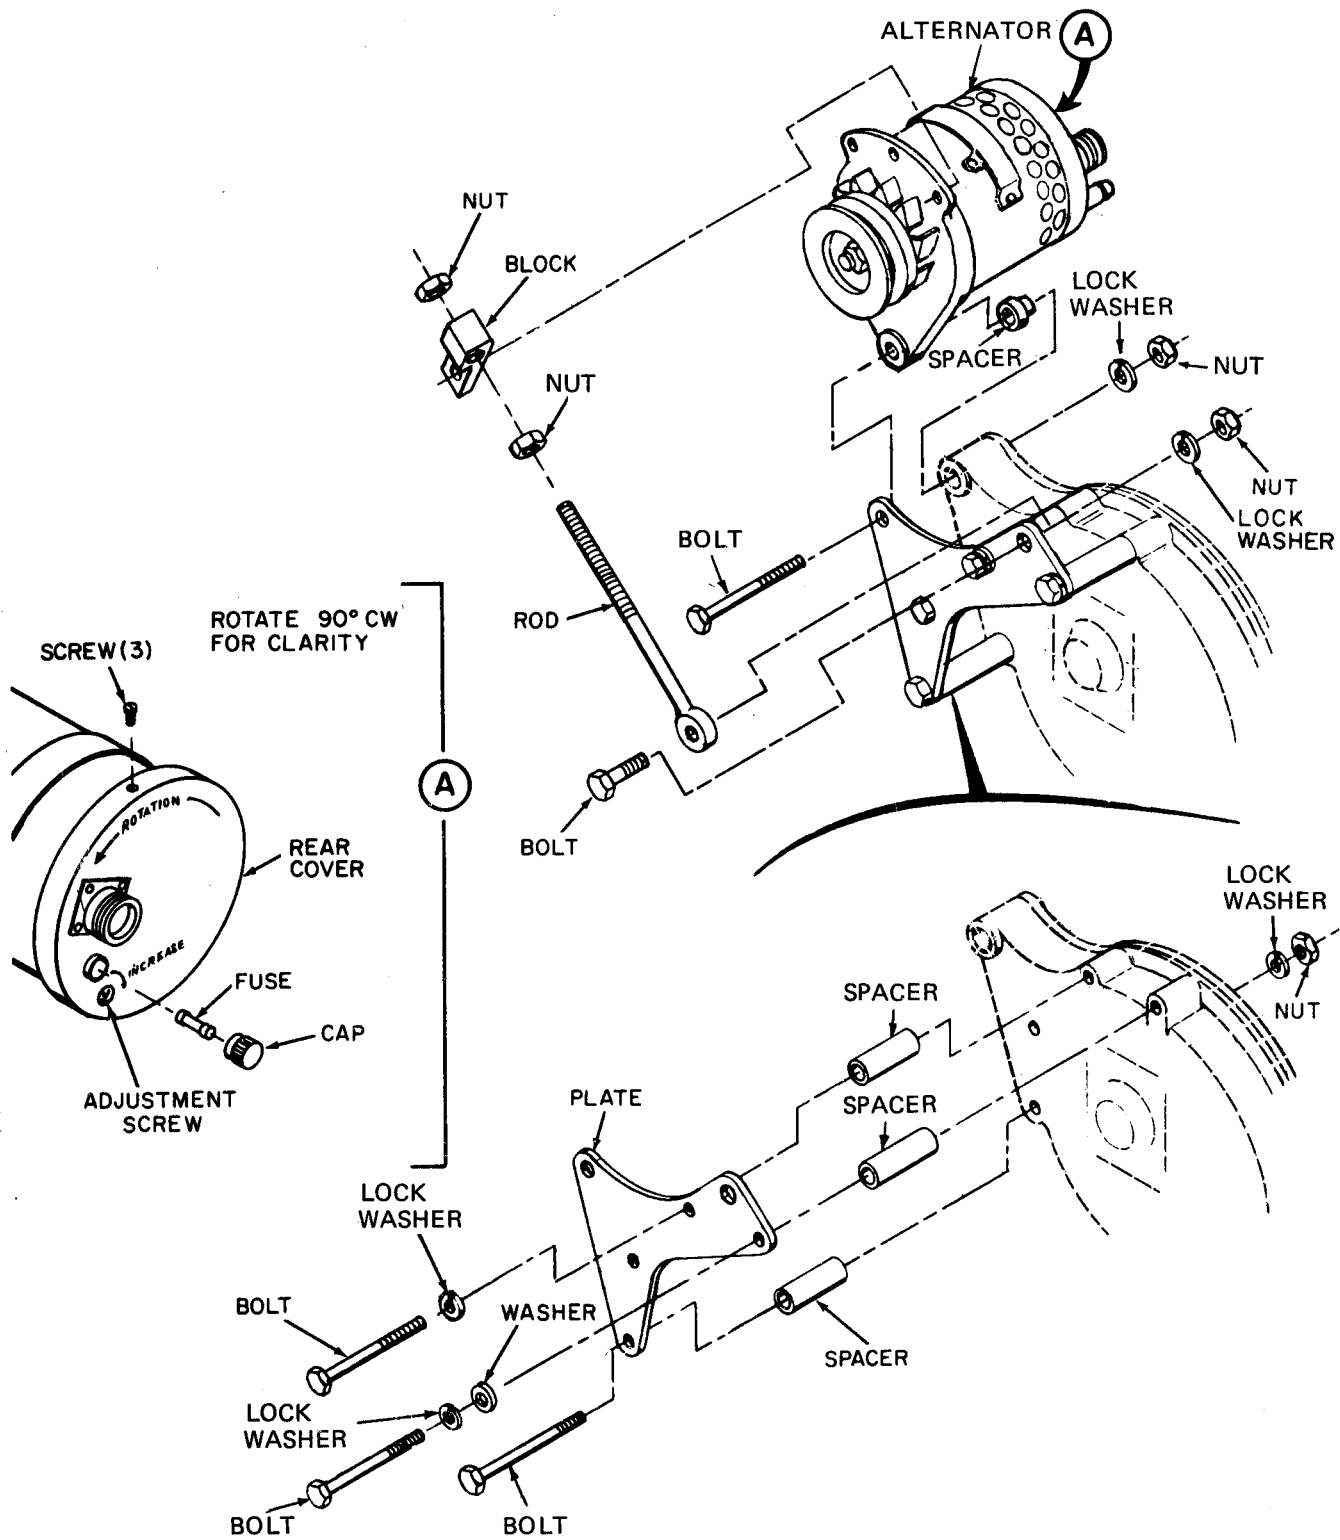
Battery charging alternator and mounting group, removal and installation
